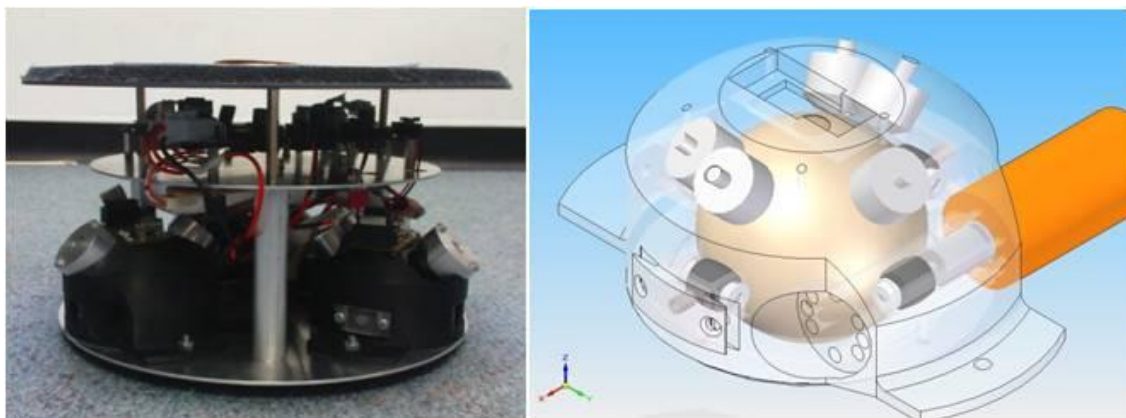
(left) Prototype omnidirectional drive robot. (right) A CAD drawing of the spherical mechanism.
